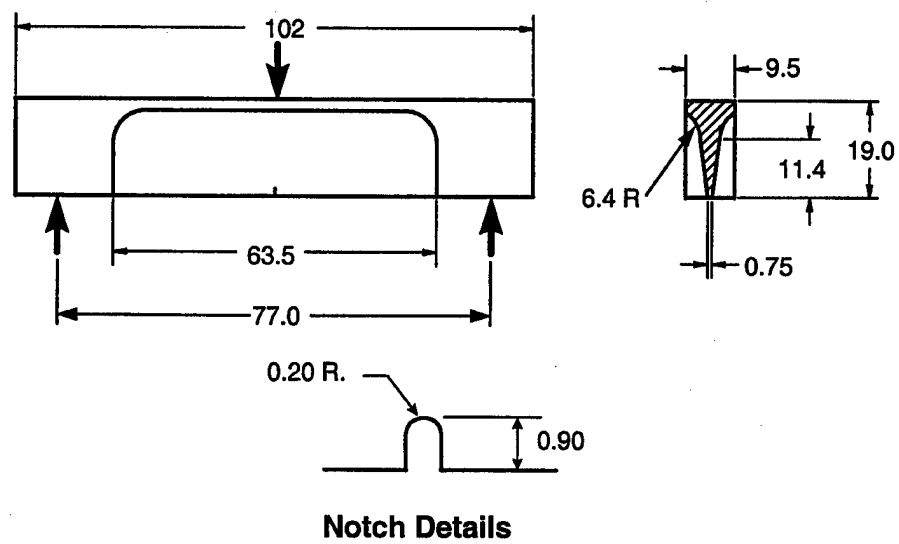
Geometry of 3-Point Bend Airfoil Specimen (dimensions in mm).
